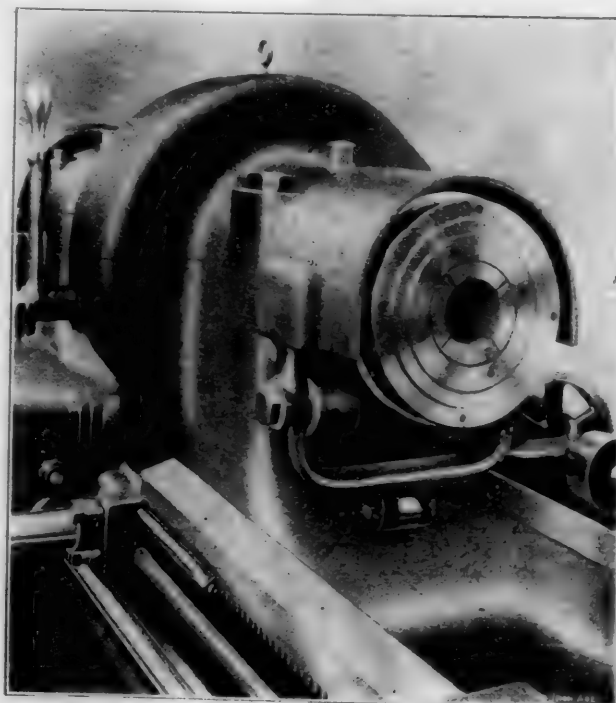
SPINDLE END AND AUTOMATIC CHUCK.
